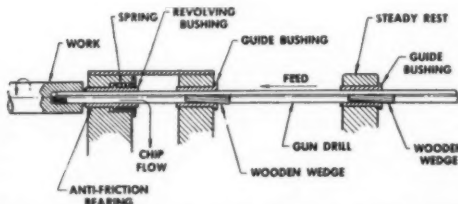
More important details in connection with drill guide bushings. Revolving guide bushing is forced against work piece under spring pressure and revolves with the work. Wooden wedges are driven into the guide bushings to dampen drill vibrations.
